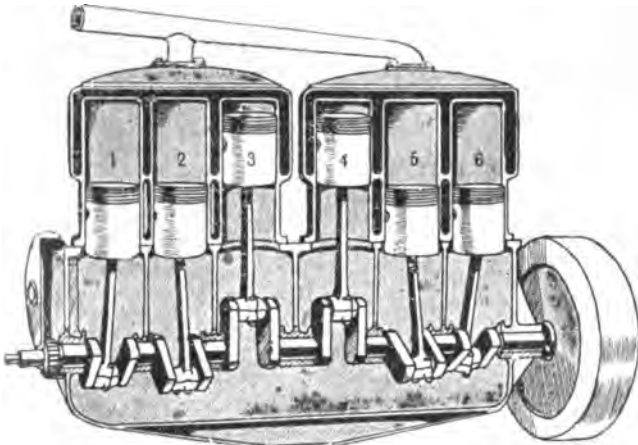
A six-cylinder engine with seven bearings to the crankshaft and cylinders cast in two blocks of three.
